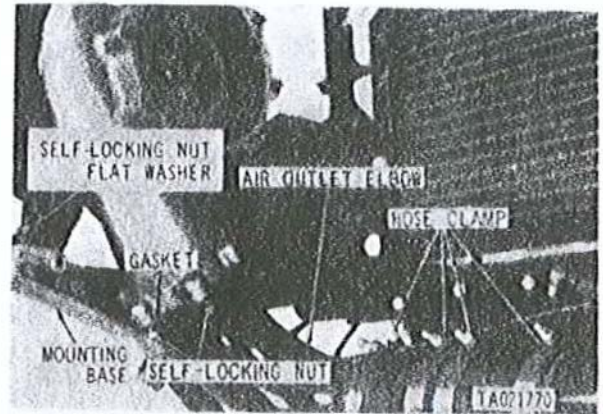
Removing or installing turbosupercharger air outlet elbow.
